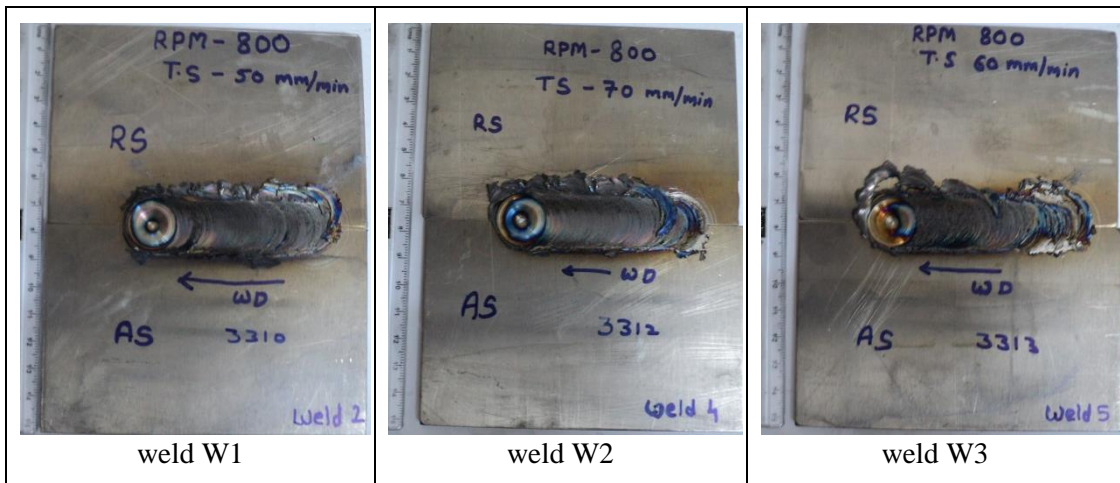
Photograph of Friction Stir Welded Ti-6Al-4V plates.
